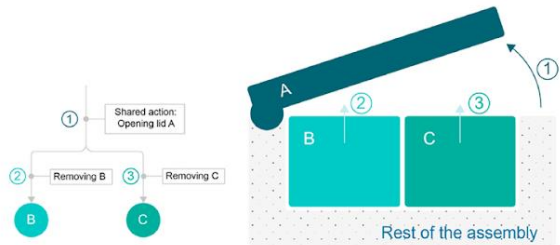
Parts that don't have to be removed (De Fazio et al., 2021)
